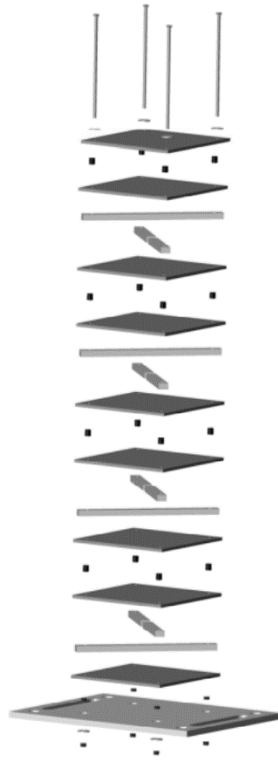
Exploded diagram of ARMS units and instructions for assembly.
